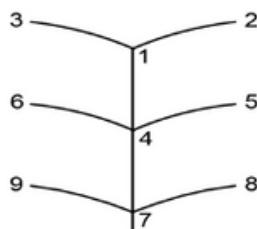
Electrode Movement for Root Pass in K-Groove Welding
